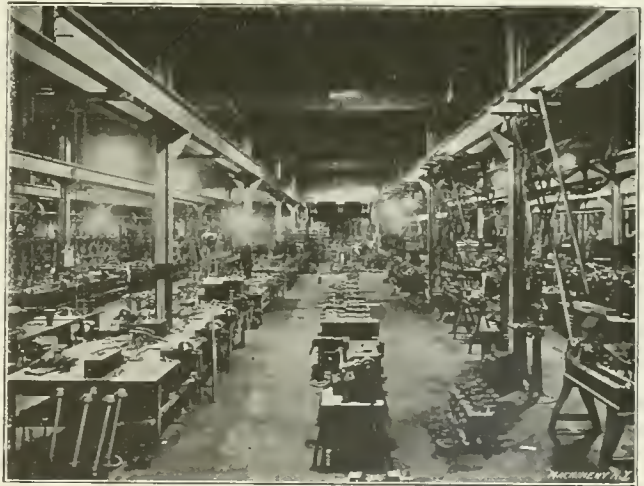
Photograph taken at Night—Building illuminated only by Cooper-Hewitt Lamps
